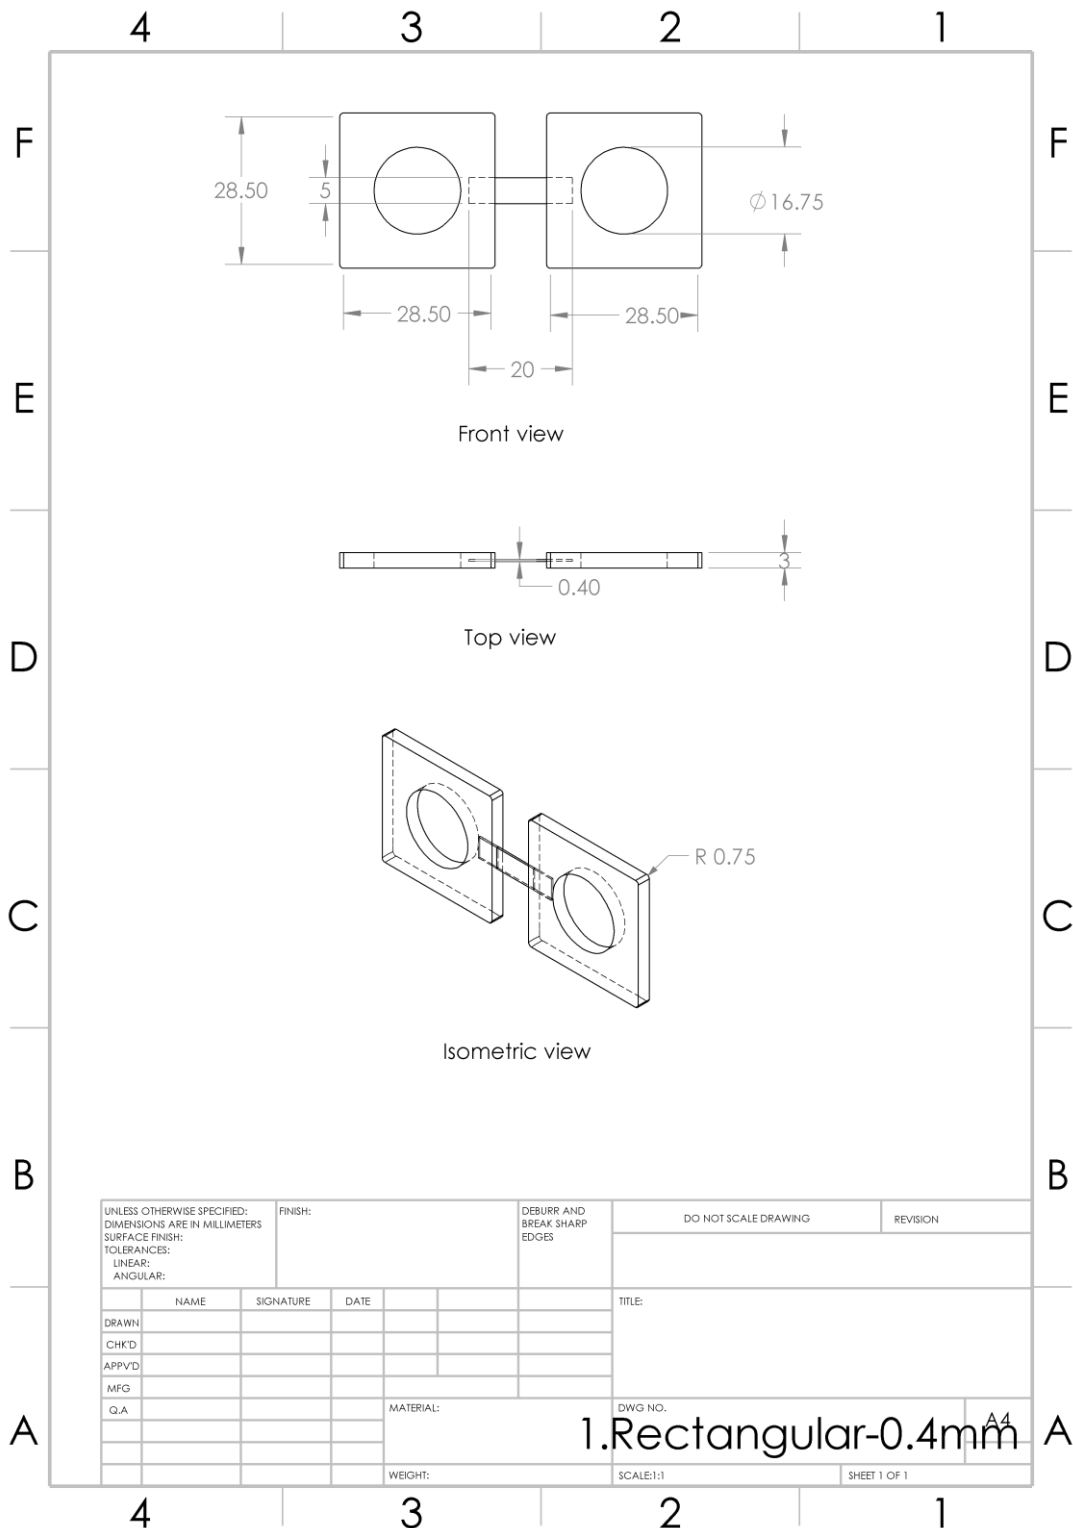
The technical drawing of the bi-material compliant mechanism with rectangular-shaped interface in 0.4 mm thickness
